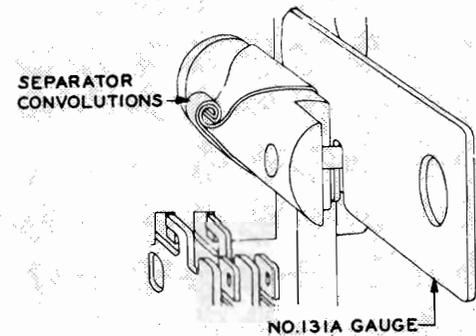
D-167911 Separator Convolutions After Removal of D-167912 Separator Adjuster
